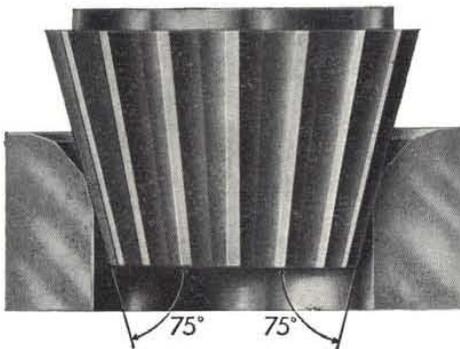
Narrowing valve seat at bottom with 75° cutter.
